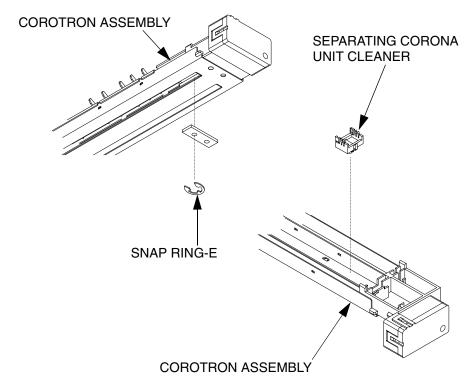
Removal of the Separating Corona Unit Cleaner
